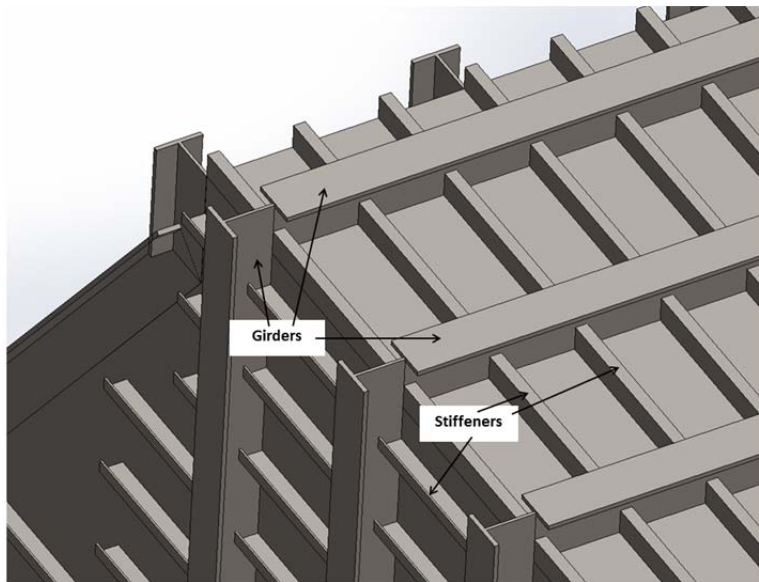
Illustration of girders and stiffeners used in Re Vision design.
